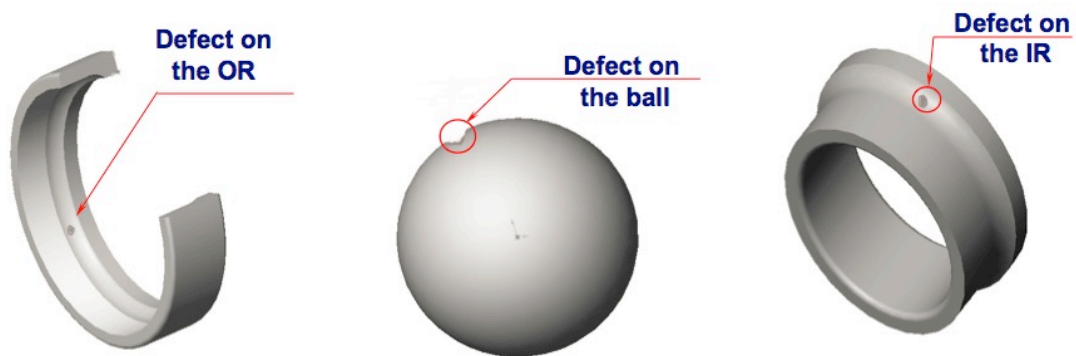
Different locations of localized defects causing injury to a ball bearing
